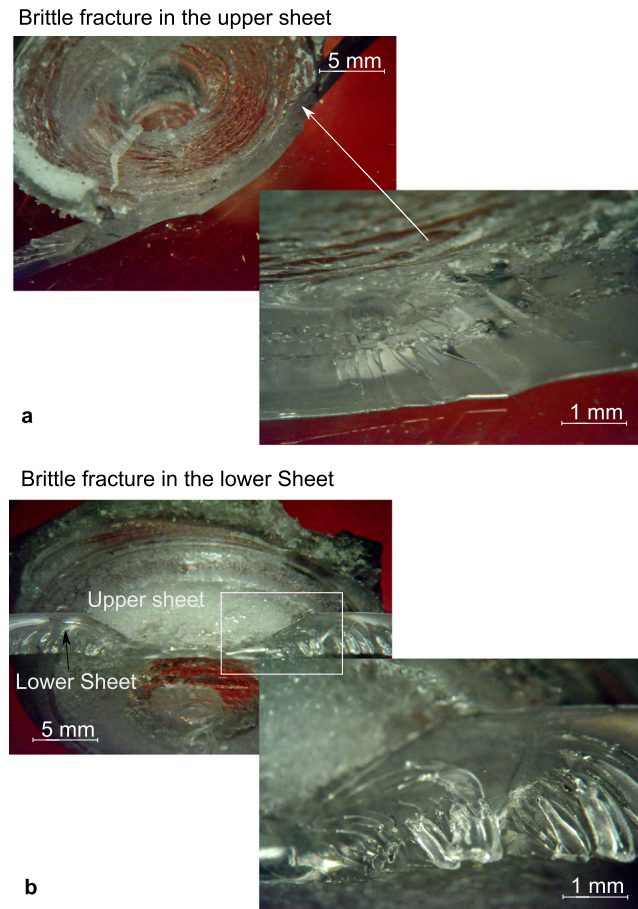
Macrographs of brittle fracture modes developing in FSSW welds
